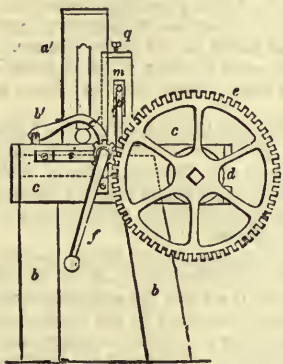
, 1379, 1380, 1381 represent a well-contrived machine for that purpose; of
